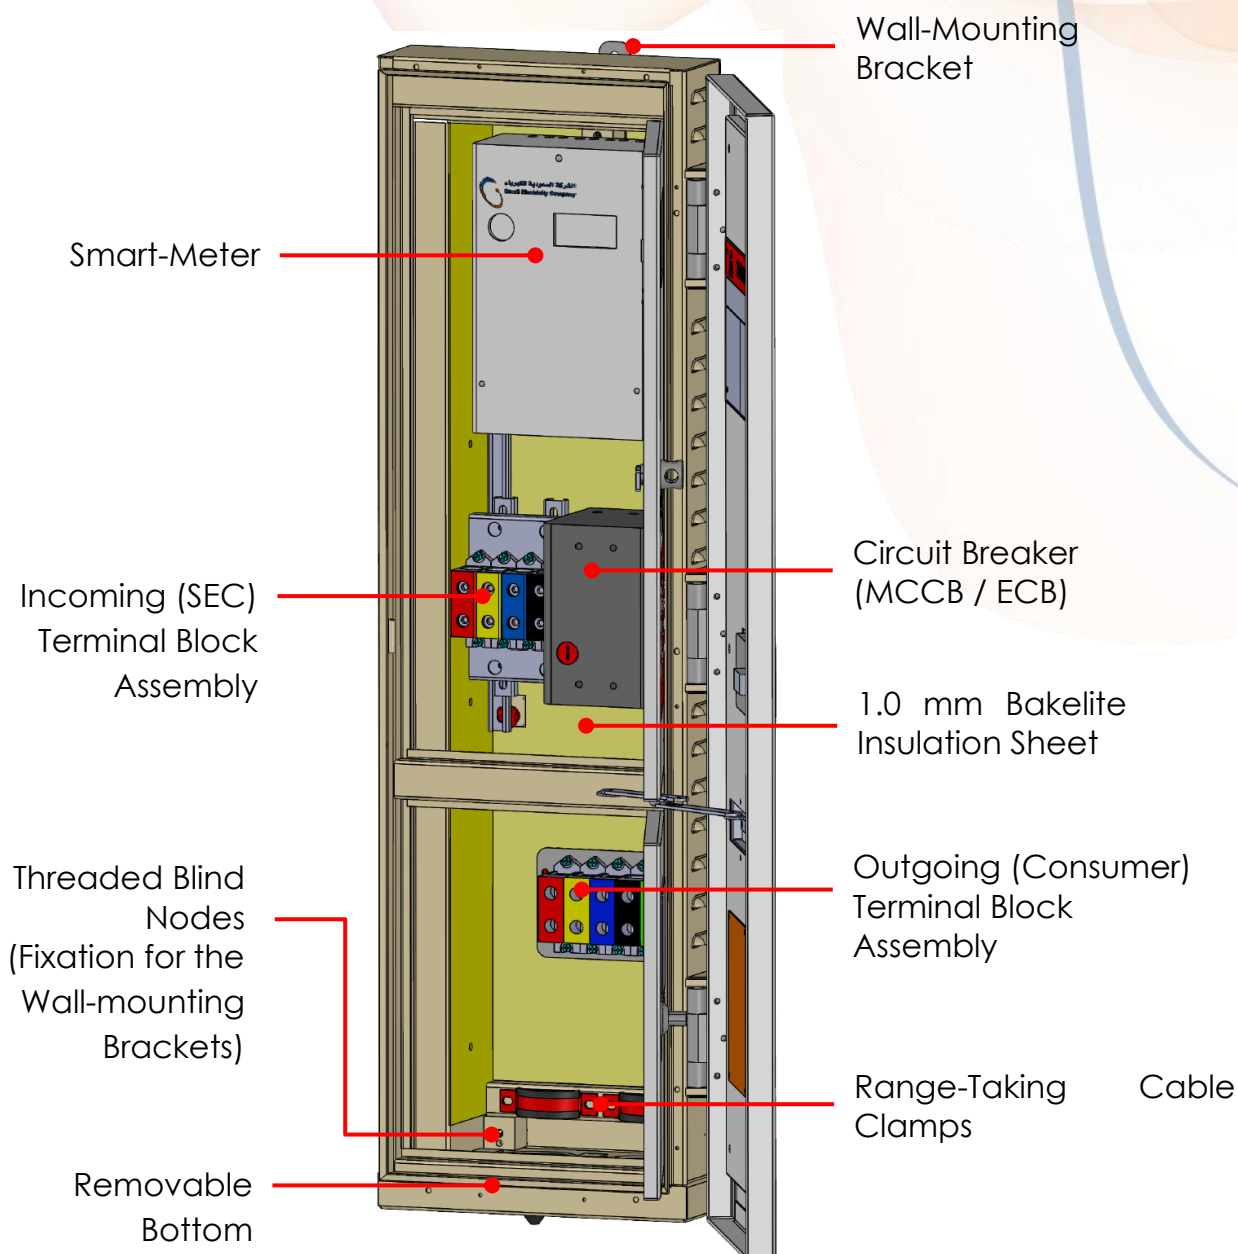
Layout Drawing of Single-Meterbox with Steel Enclosure with Main Door Opened
